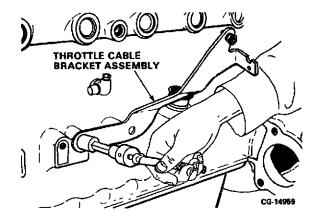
Remove the Throttle Cable Bracket Assembly
